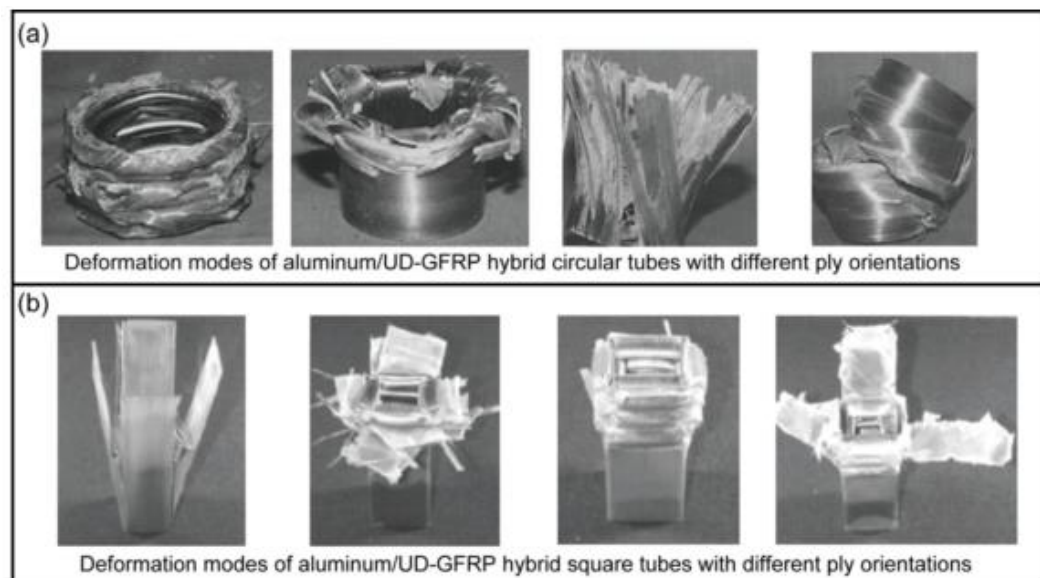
Axial crushing modes of hybrid tubes (a) circular tubes (b) square tubes [60]
